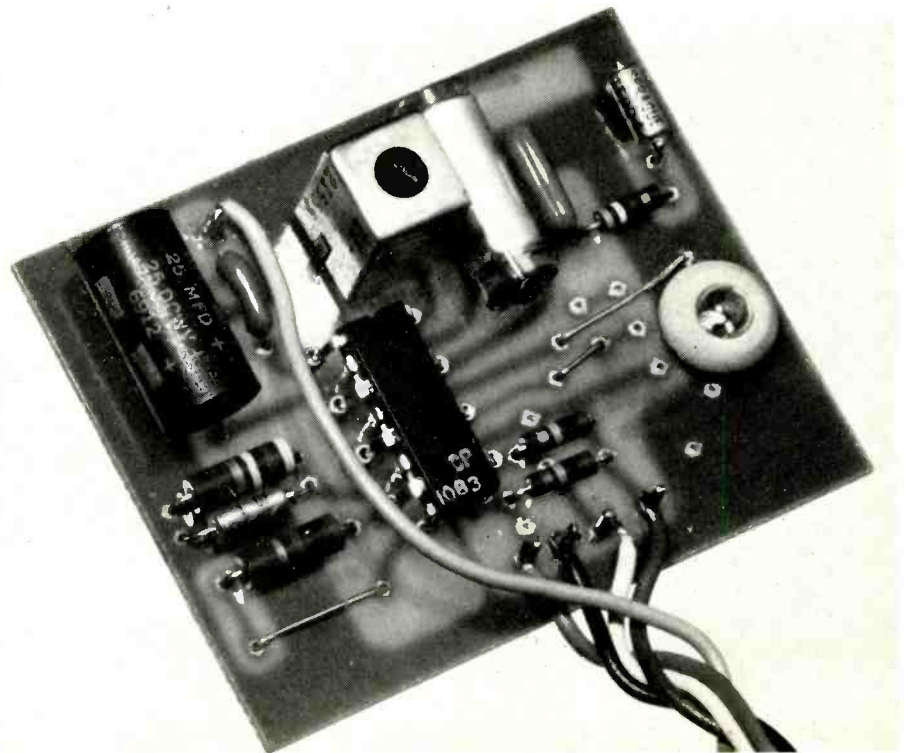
Photograph of the prototype. Because this is a demonstration model built by R.C.A. some of the components shown in Fig. 2 are not included.
